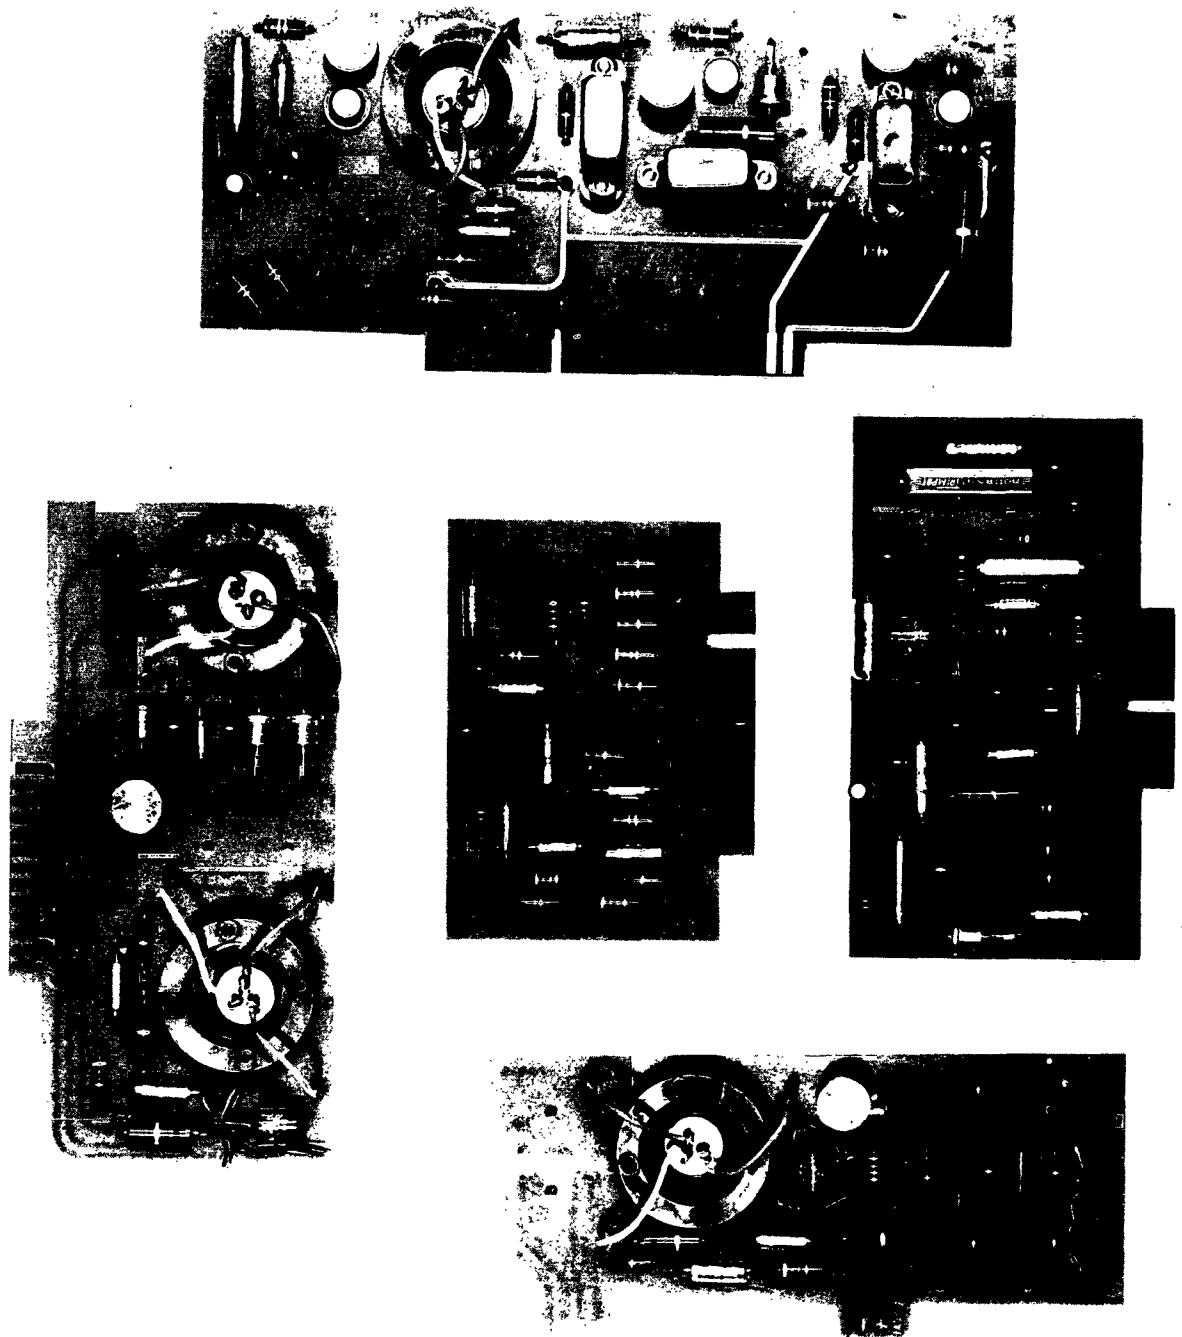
Top View - Prototype Transistorized Printed Circuit Plug-in Cards
